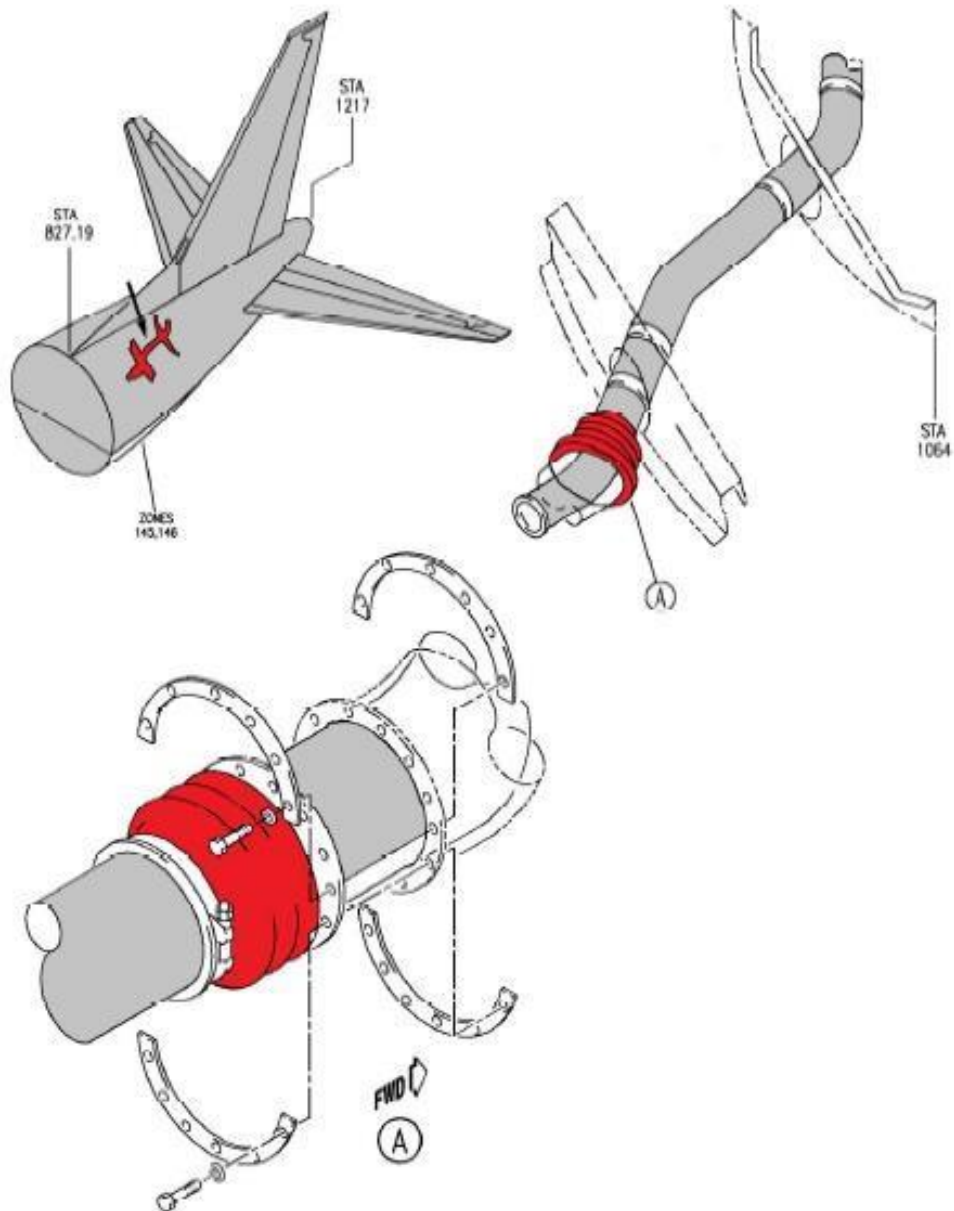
REPLACEMENT: AFT PRESSURE BULK HEAD SLEEVE.
